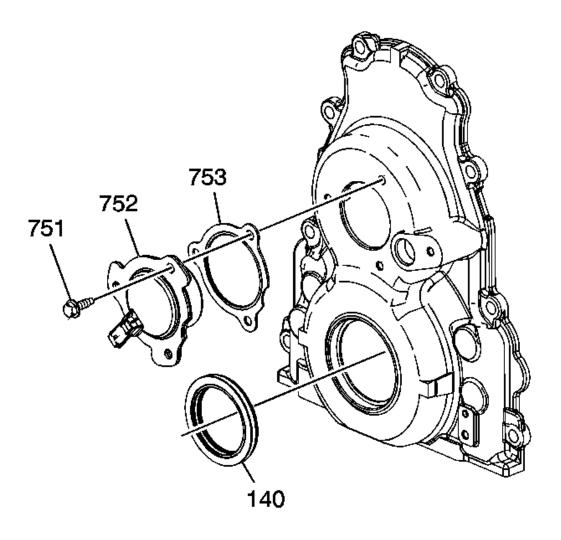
View Of CMP Actuator Magnet, Bolts, Gasket & Oil Seal
